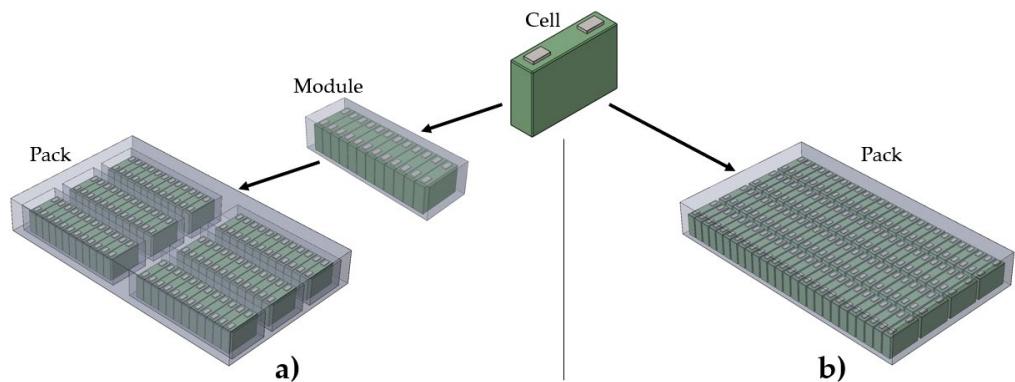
Schematic drawing of (a) cell-to-module design and (b) cell-to-pack design.
